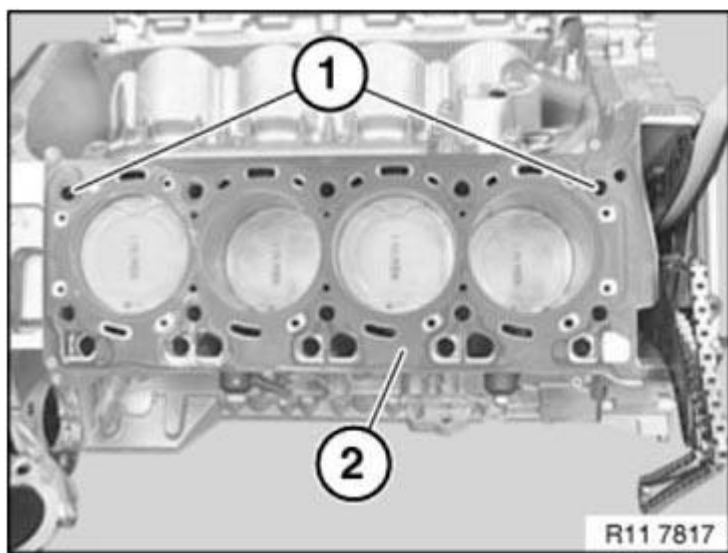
Identifying Fitting Sleeves And Cylinder Head Gasket
